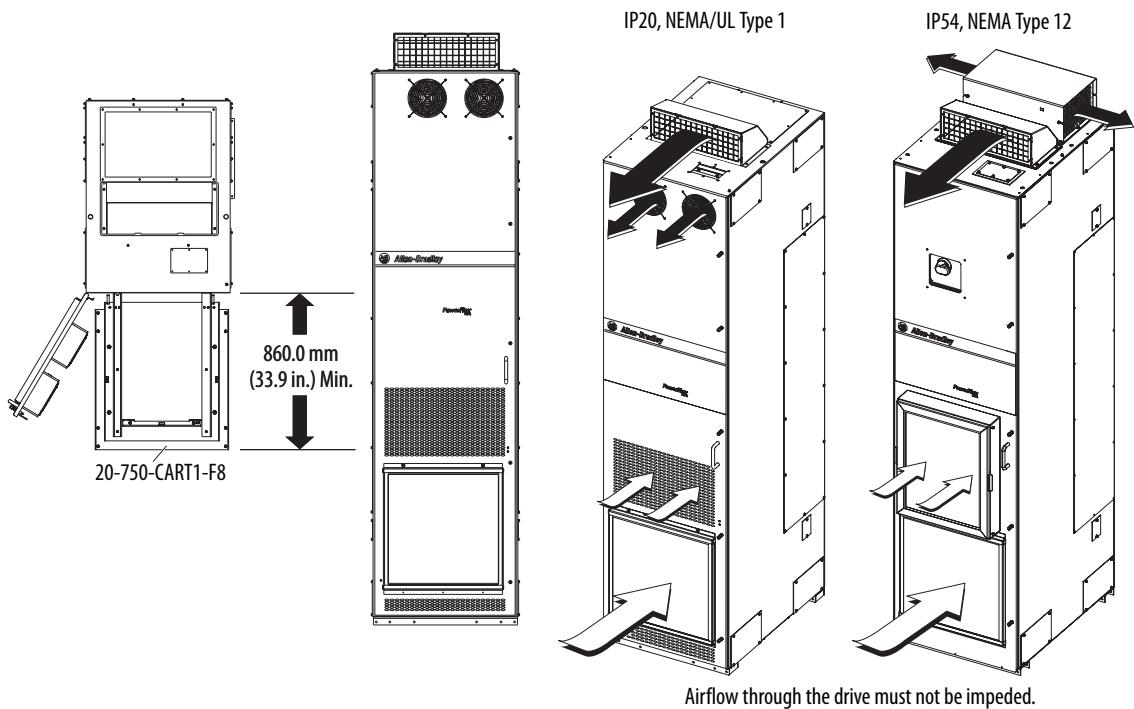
Minimum Mounting Clearances Drive Cabinets
